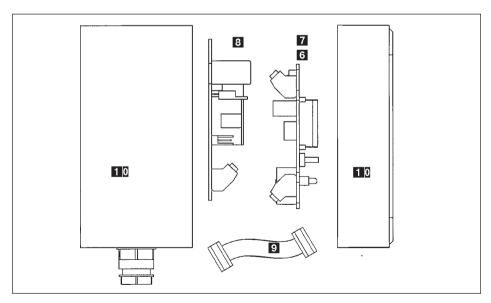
Spare Parts Explosion Drawing pH controller type 8205 wall-mounted
